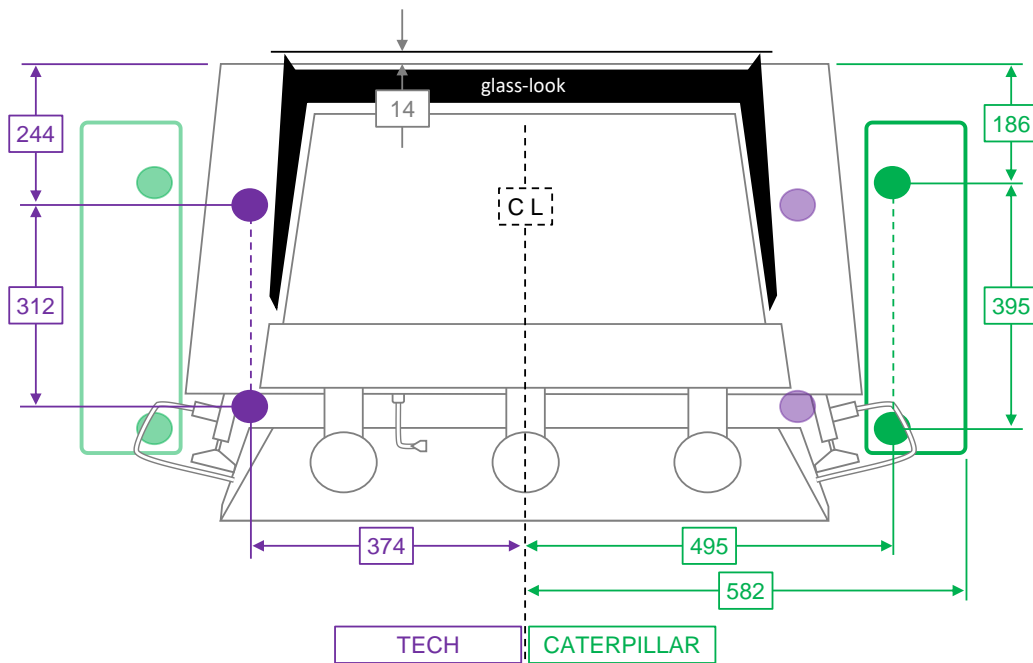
Location of rubber feet for the TECH (in purple, left) and CATERPILLAR (right, in green) legs. Note that the optional glass-look cup-rail extends 14 mm to the back of the body. CL is the centre line of the machine, dimensions in millimetres can deviate +/- 5 mm.
